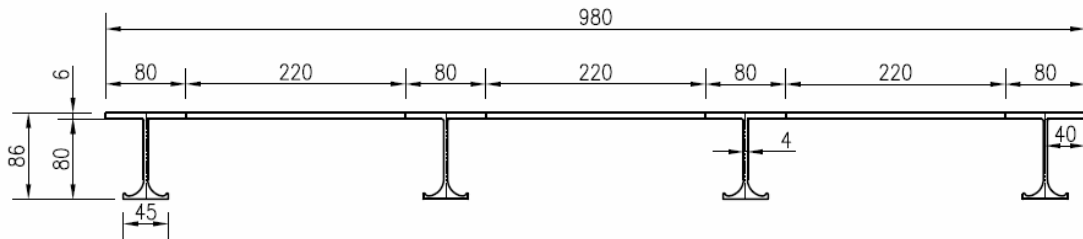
(a) Layout of test structure 19C for friction stir butt-joining in mm
